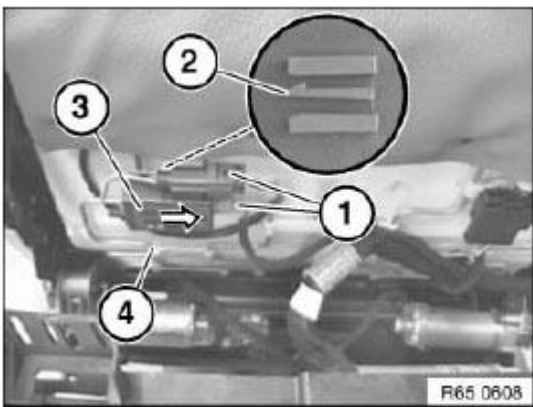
Removing Control Electronics For Passenger Seat Occupancy Detector
